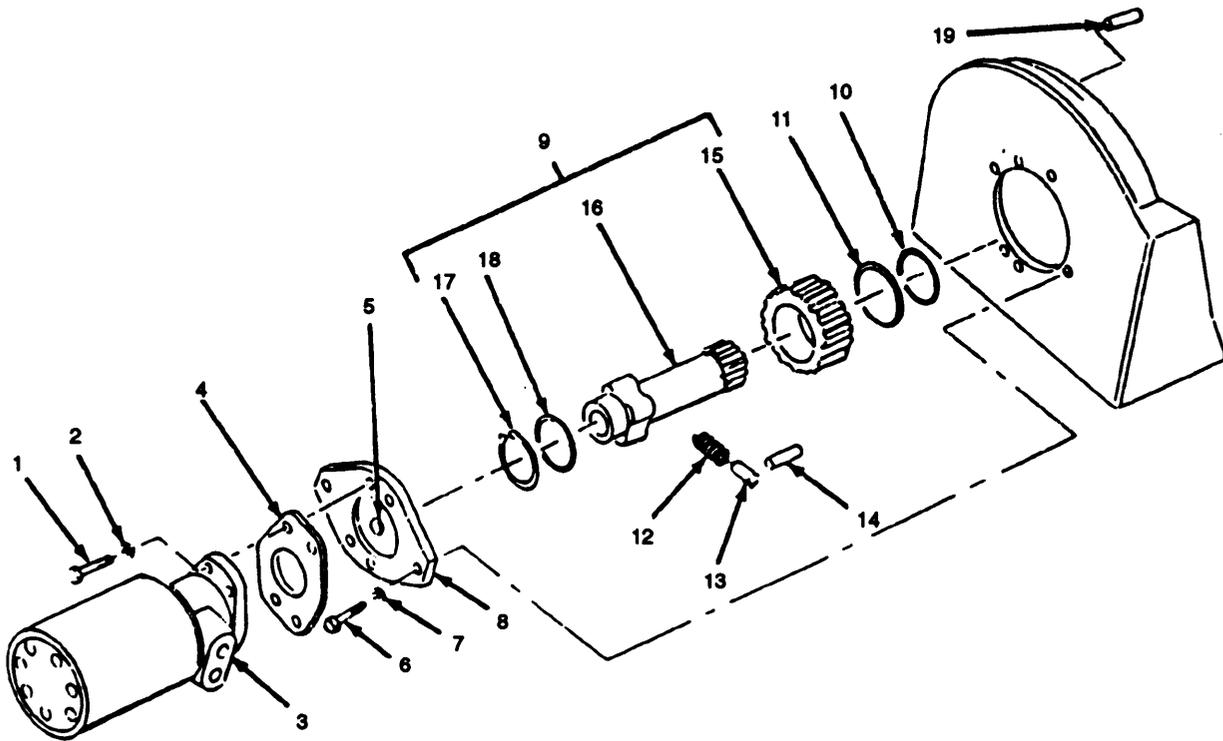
Winch Assembly Model PG-115-043R, Disassembly (Sheet 1 of 5).
